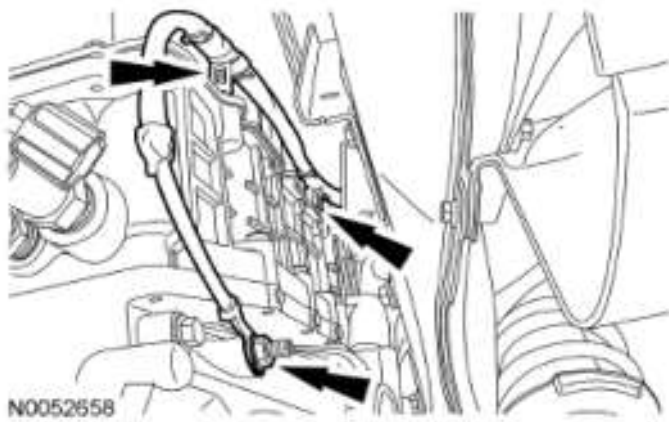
Locating Harness Fasteners, Nut And Ground Cable
